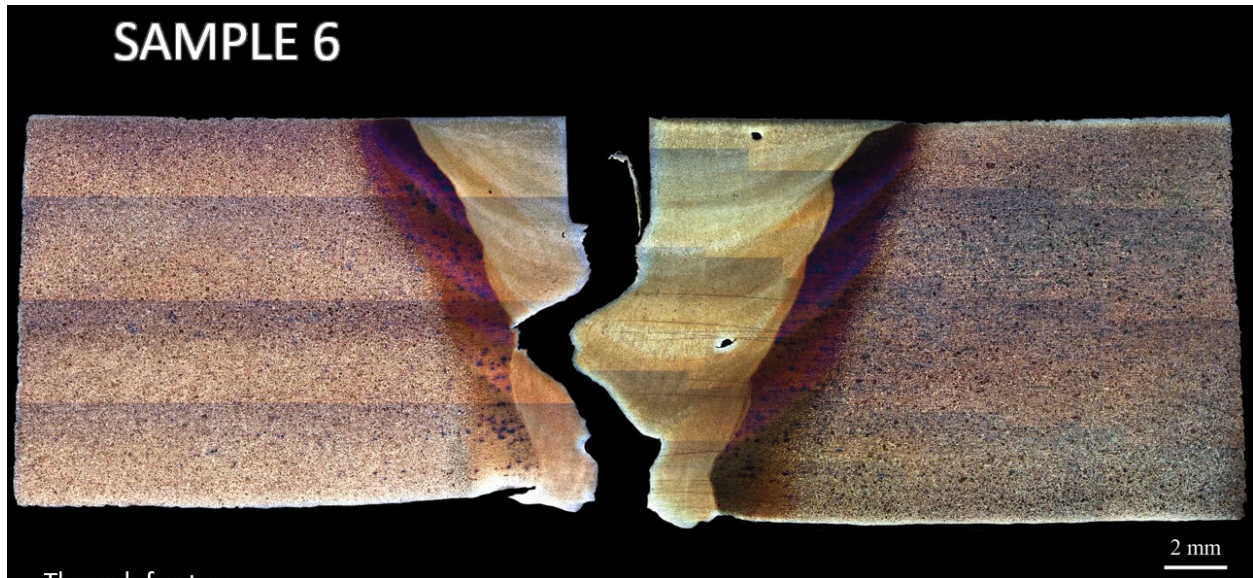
Photo of sample 6 microscopy showing through fracture with crack path through weld metal; crack path appears to deviate direction at the interface of multi-pass welds
